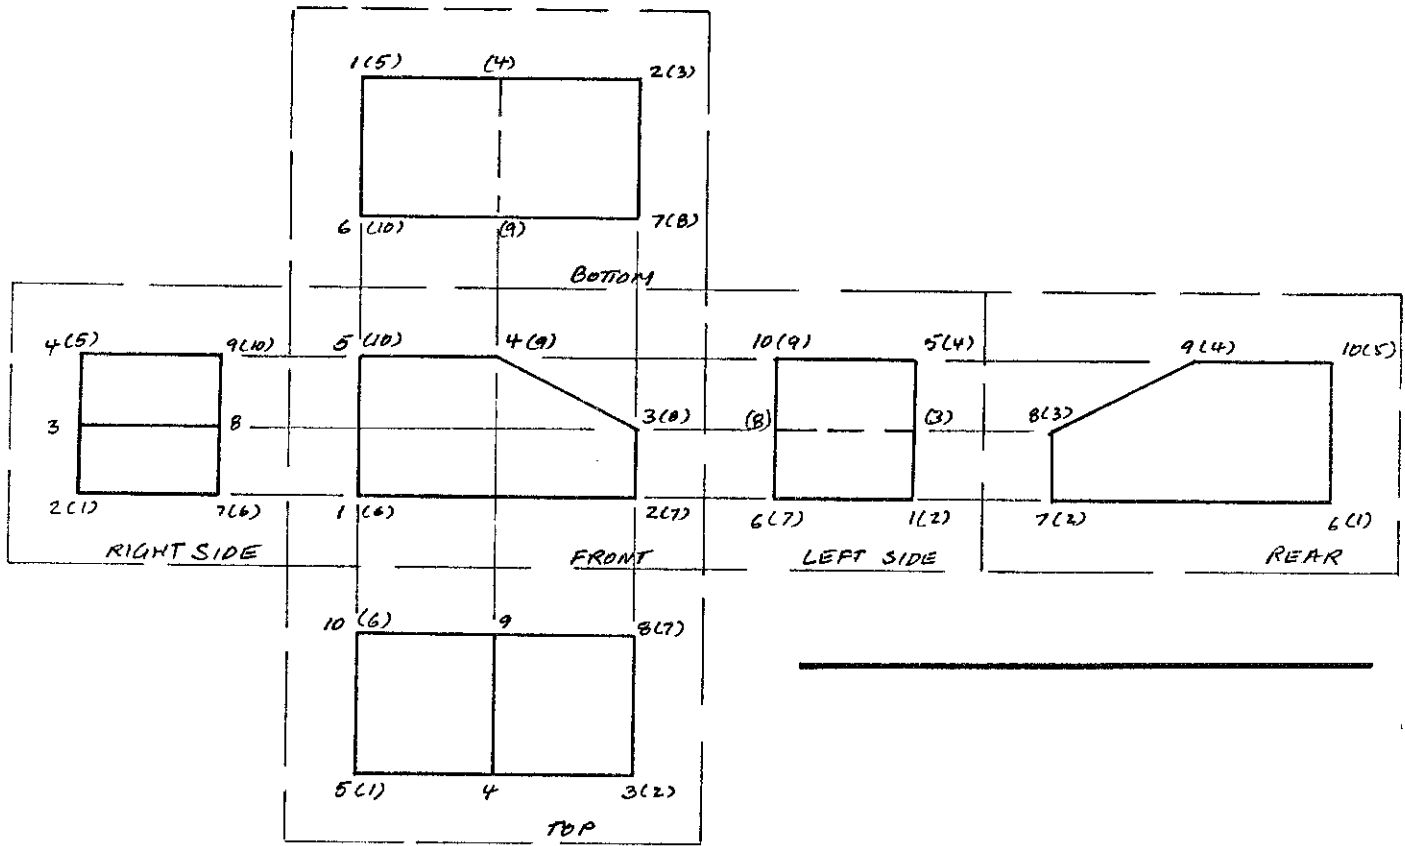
Multi-view drawing of the glass box arrangement of Figure 6a
